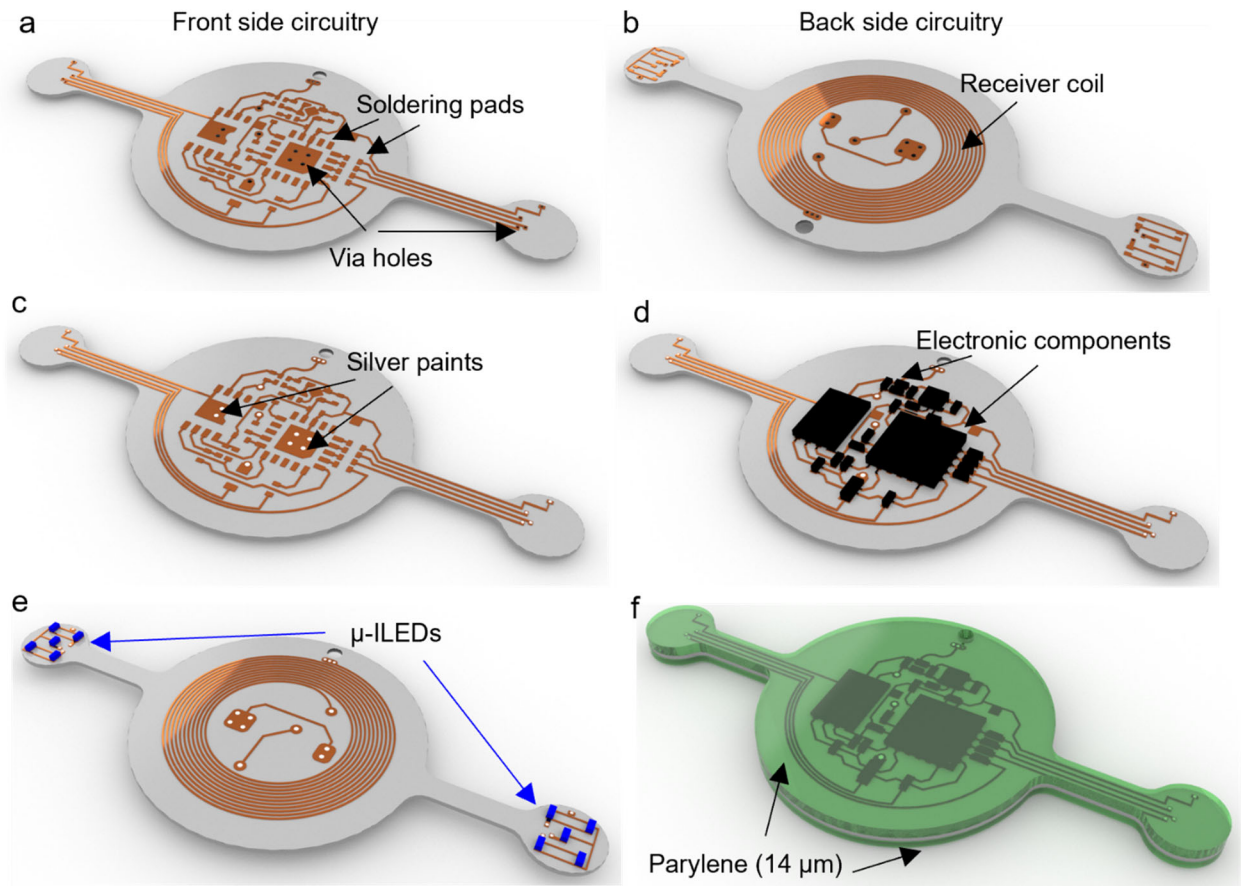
Fabrication process for μ C-contained wireless optogenetic devices that power bipedal eBibots. (a)-(b) Apply aligned laser ablation process on front (a) and back (b) surfaces of a tri-layer flexible printed circuit board (fPCB) composed of Cu ($18\ \mu\text{m}$) – polyimide (PI, $75\ \mu\text{m}$) – Cu ($18\ \mu\text{m}$) to define receiver coil, soldering pads, and via holes. (c) Fill via holes with silver paint to connect top and bottom circuitry. (d)-(e) Apply hot air soldering to mount electronic components (d) and μ -ILEDs (e) on designated locations. The number of μ -ILEDs can be further adjusted based on experimental requirements. (f) Encapsulate the entire device with chemical vapor deposited parylene ($14\ \mu\text{m}$).
